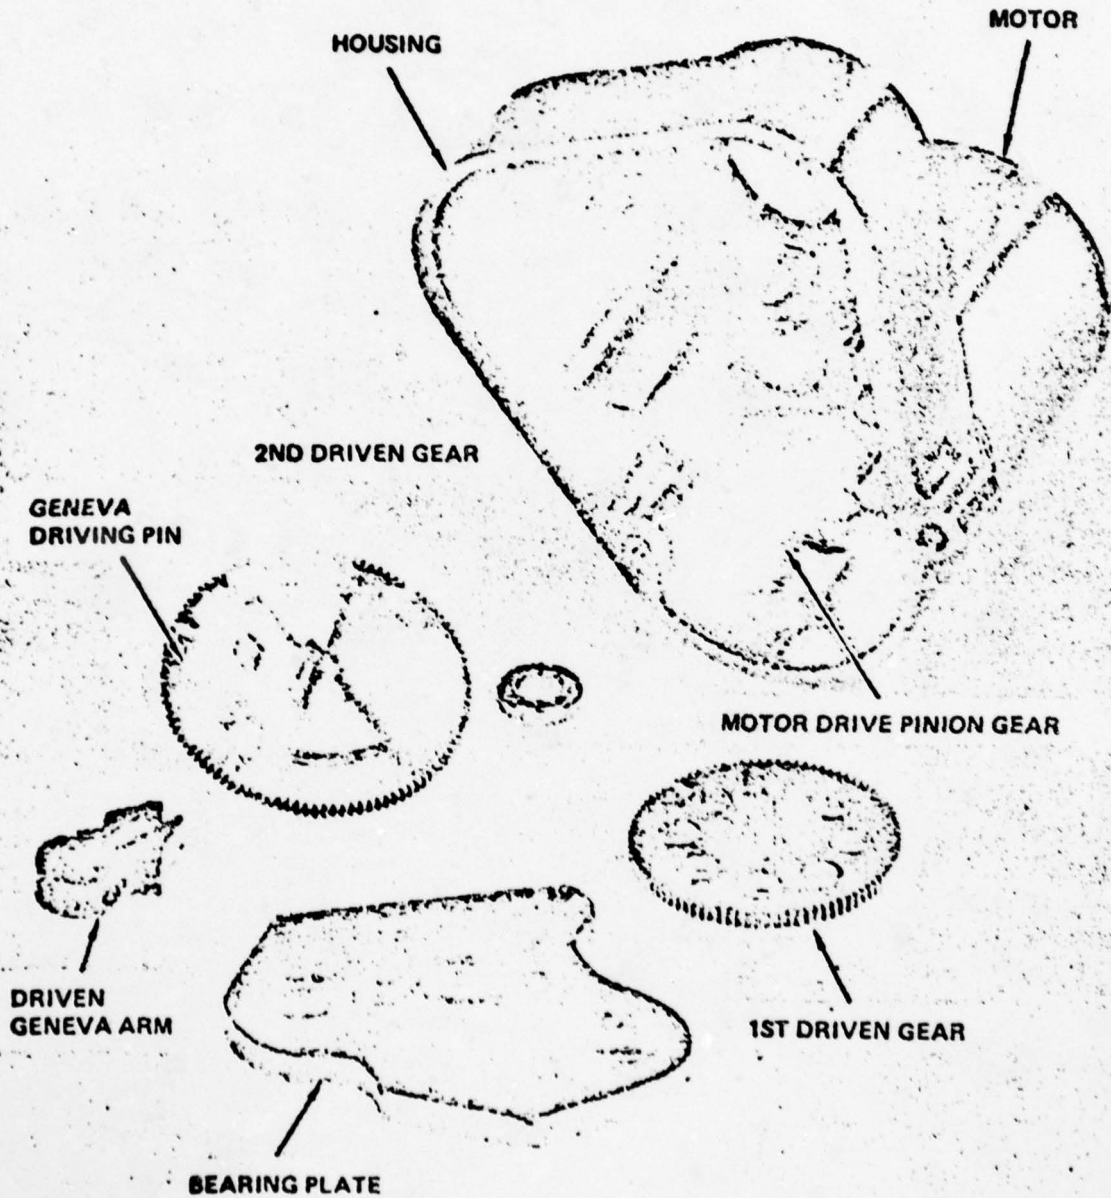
Enable Switch Motor Gear Train and Housing Components
